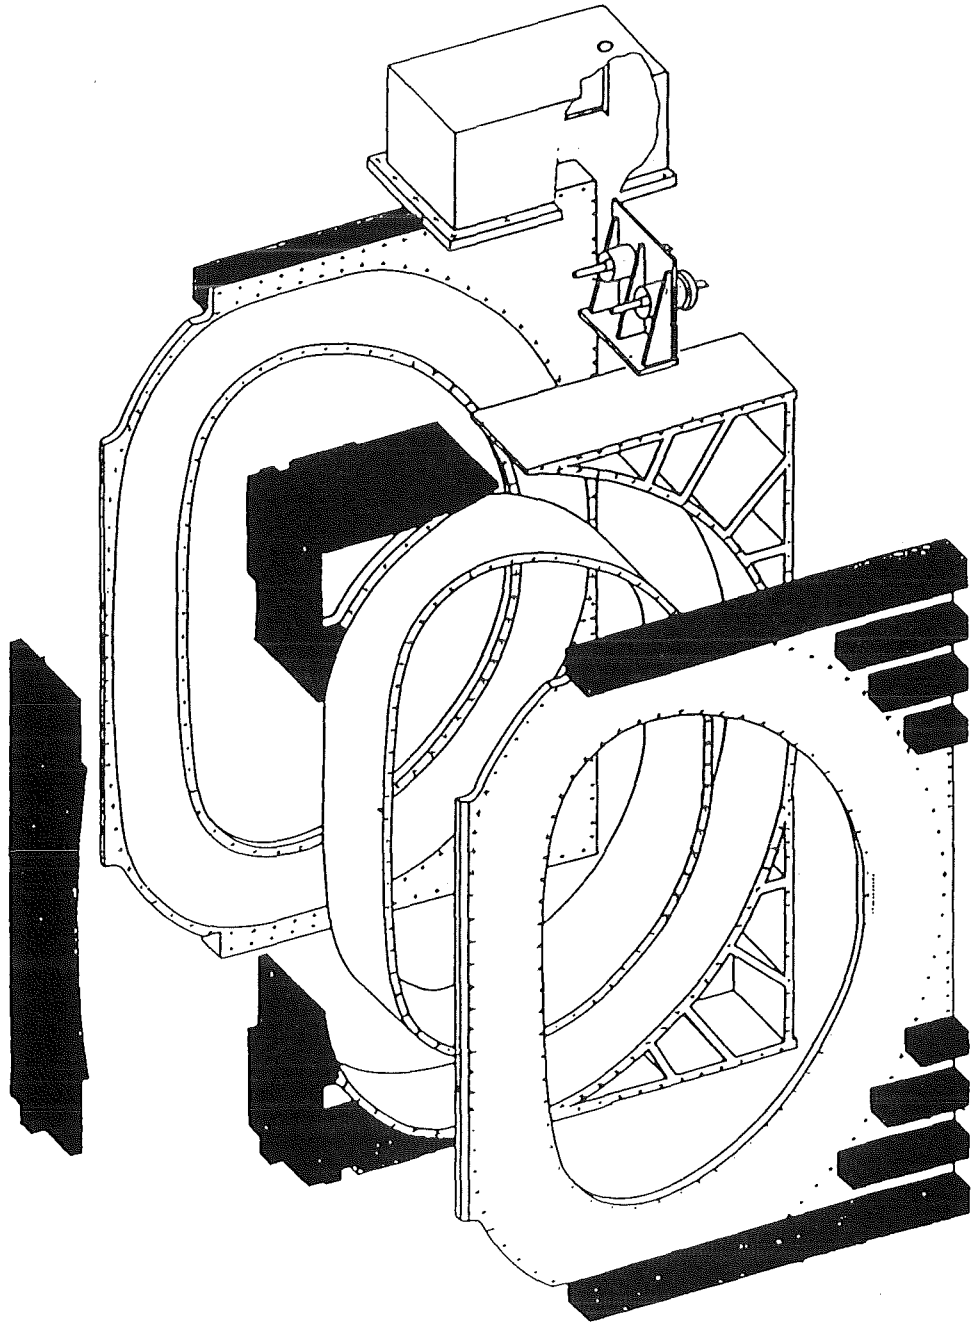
Exploded view of the LCT-CH coil case
